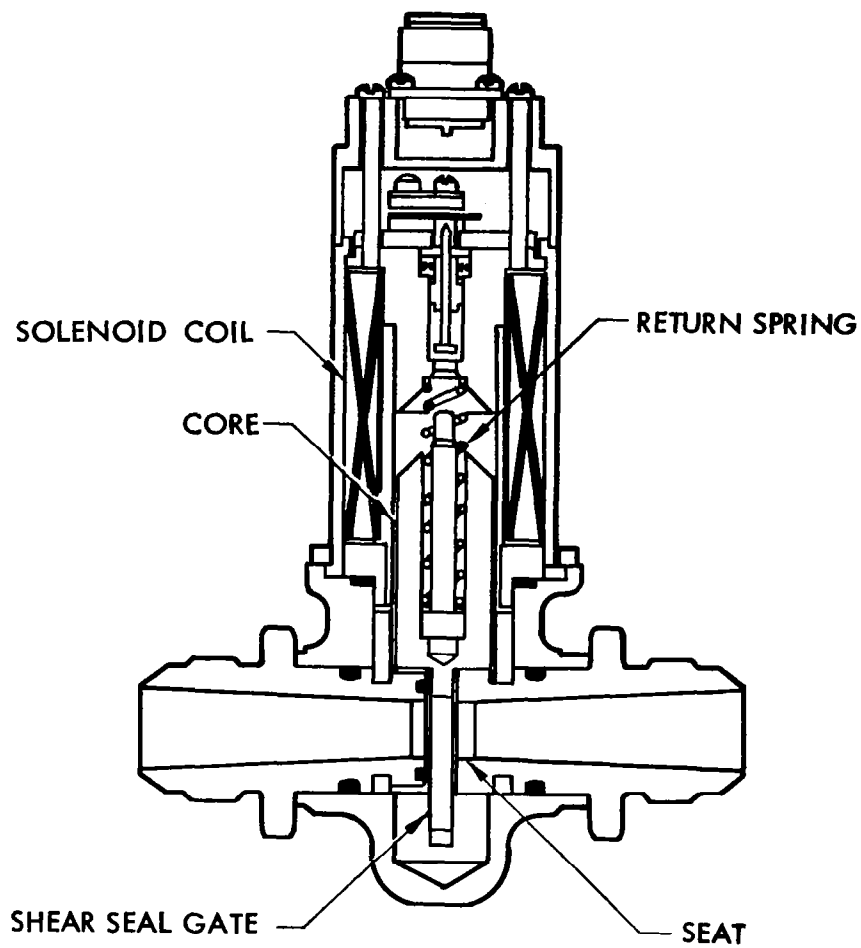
TYPICAL SHEAR SEAL VALVE
